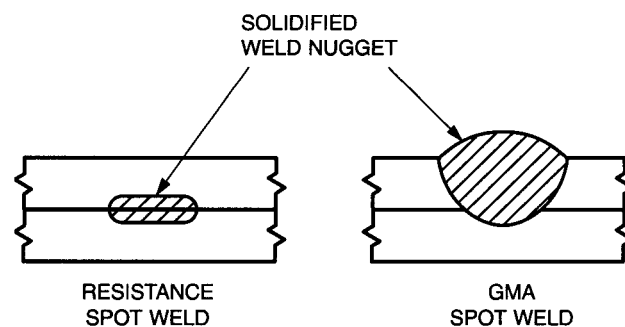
Comparison of a Resistance Spot Weld with a Gas Metal Arc Spot Weld
